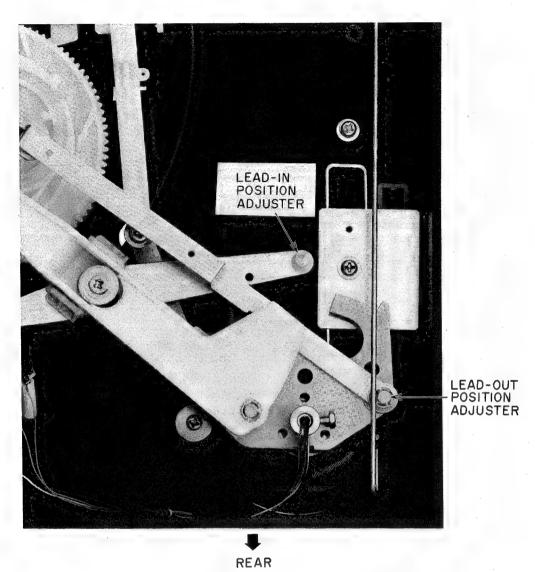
LEAD-IN/OUT Position ADJ (Bottom View)
